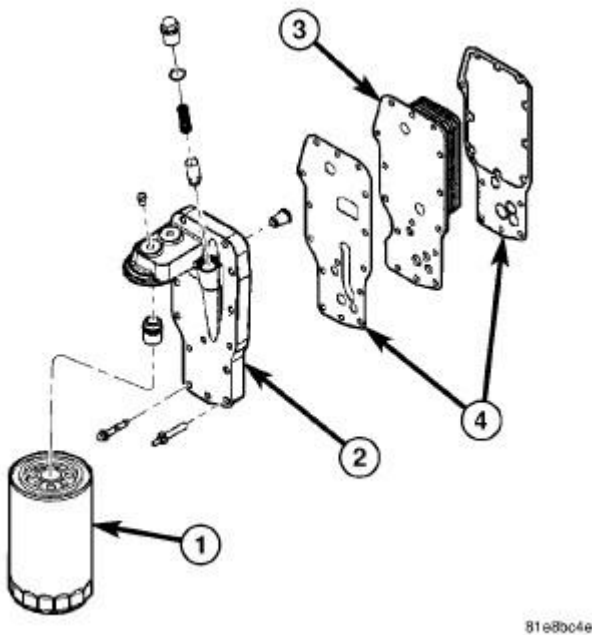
Oil Filter, Oil Cooler Housing, Oil Cooler & Gaskets
